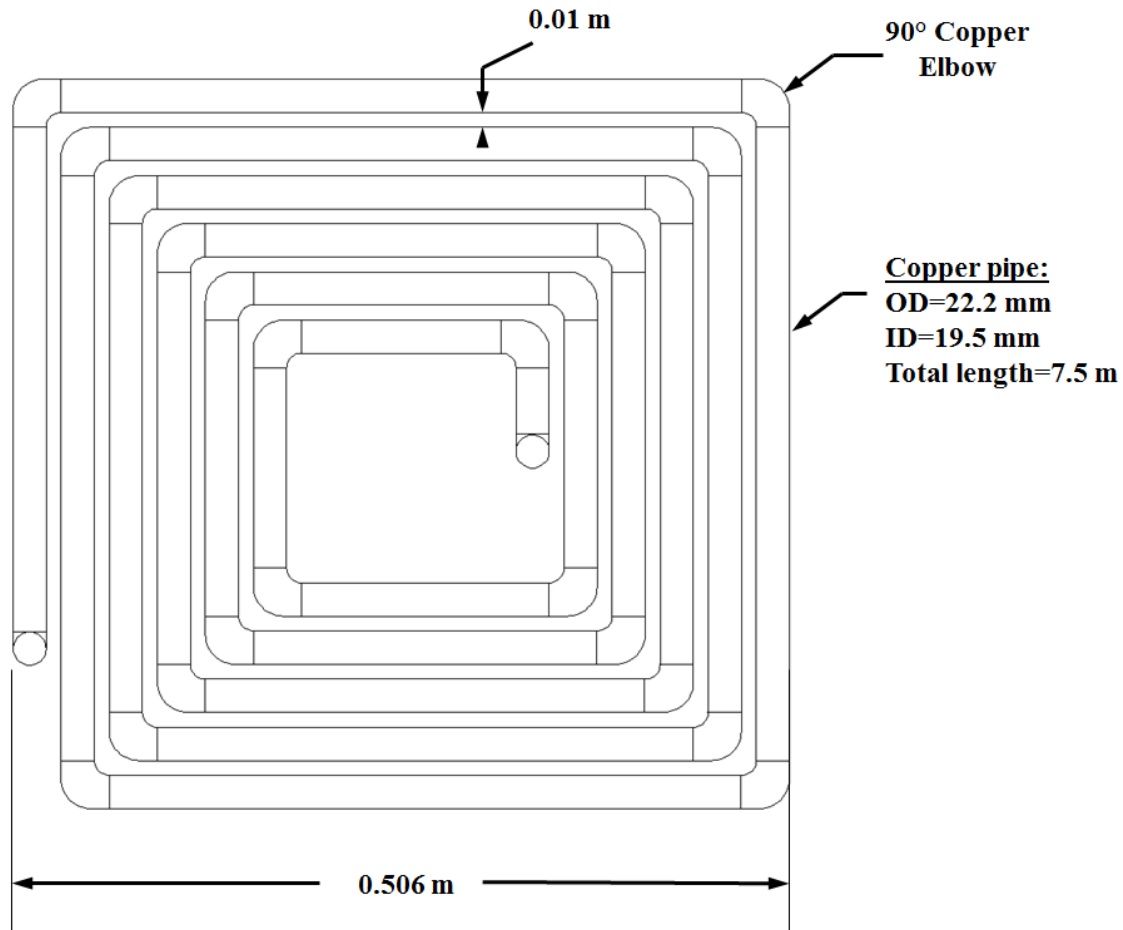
Schematic of the design of the square-spiral coil illustrating basic dimensions.
